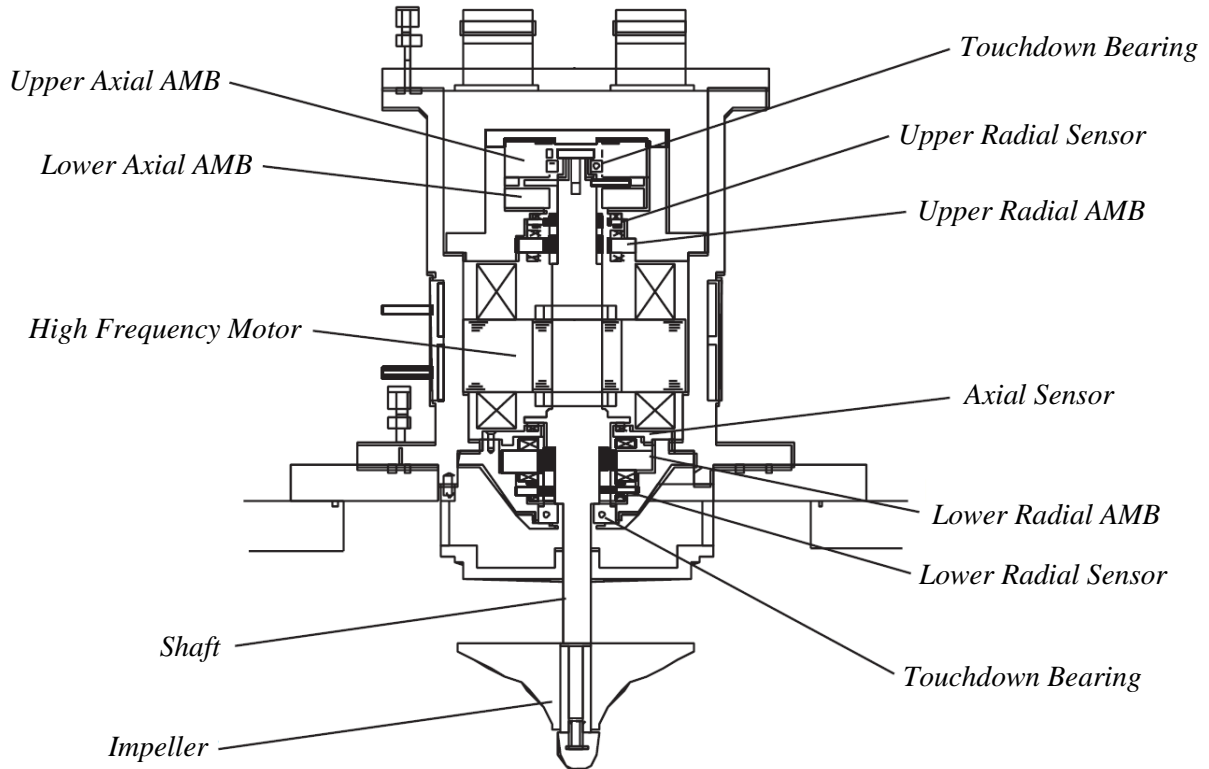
Example schematic of a cryogenic centrifugal compressor system operating with an active magnetic bearing and direct motor drive, adapted from [49]
